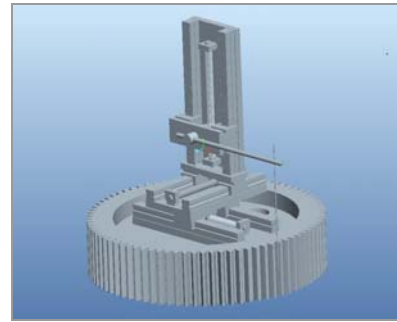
The assembly diagram of big gear repair welding mechanism and big gear.
